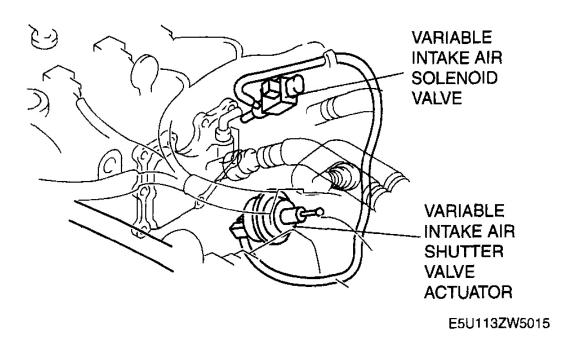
Identifying Variable Intake Air Solenoid Valve & Variable Intake Air Shutter Valve Actuator
